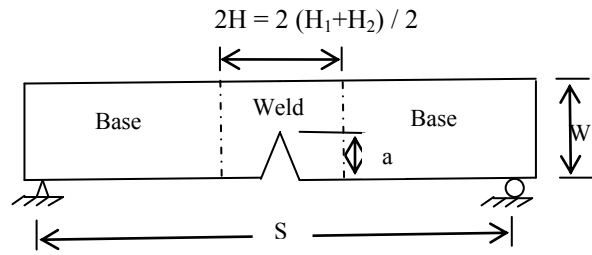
Idealized TPB specimen with weld centre crack
